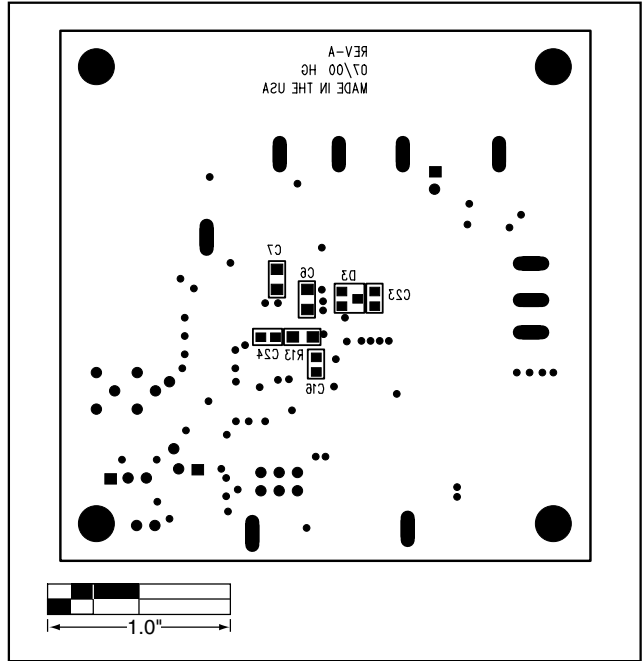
MAX1772 EV Kit Component Placement Guide—Solder Side
